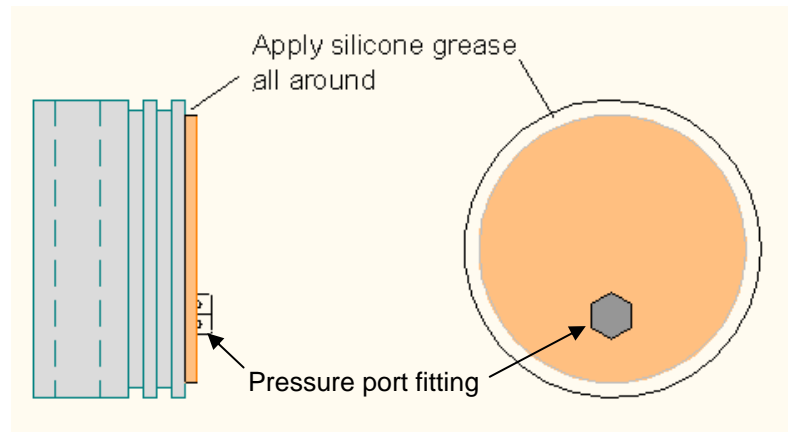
Application of protective silicone grease on Forward Bulkhead
